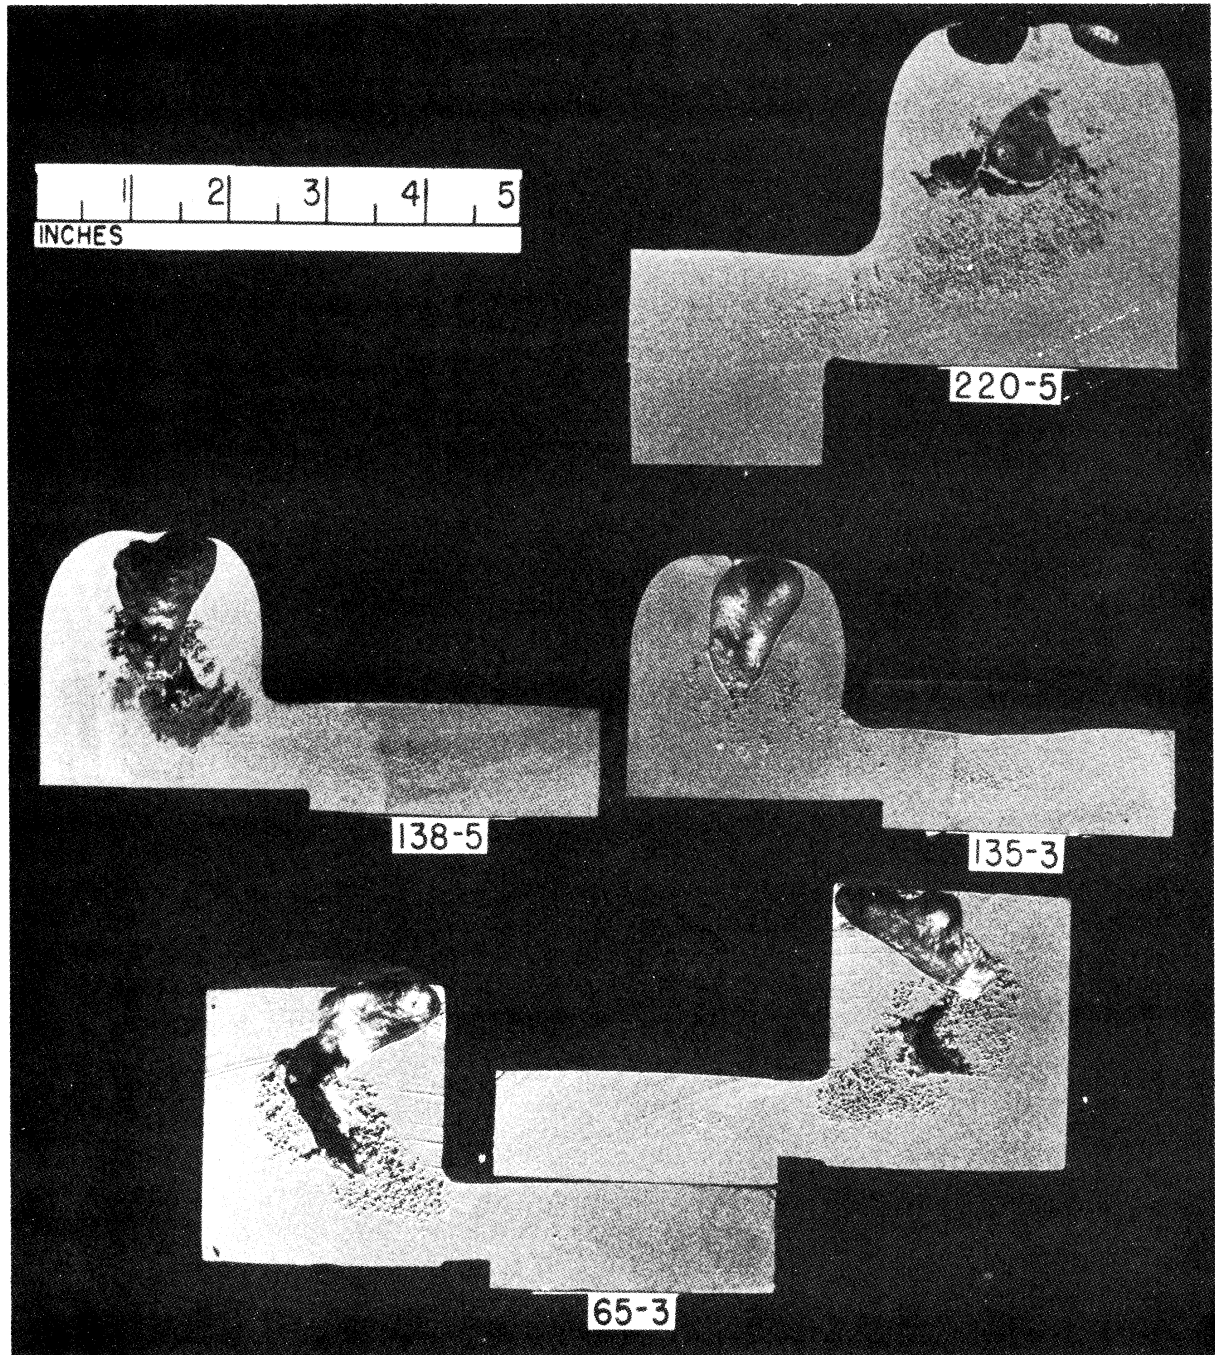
Four Types of Defects Encountered in This Investigation. Casting No. 220-5 Has Riser Shrinkage; No. 138-5 Has Centerline Shrinkage; No. 135-3 Has Surface Shrinkage in Addition to Centerline; No. 65-3 Has Bulging (Thicker at Center than at Edges).
